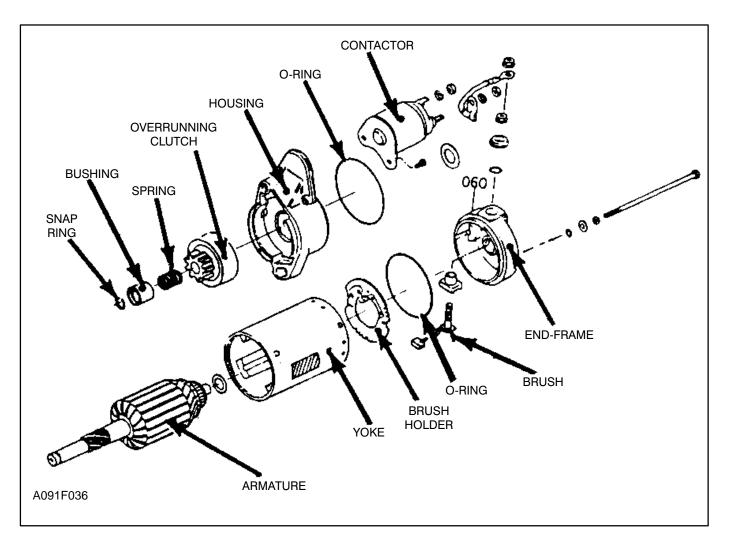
STARTER ASSEMBLY, GH170 AND GH280 ENGINES
